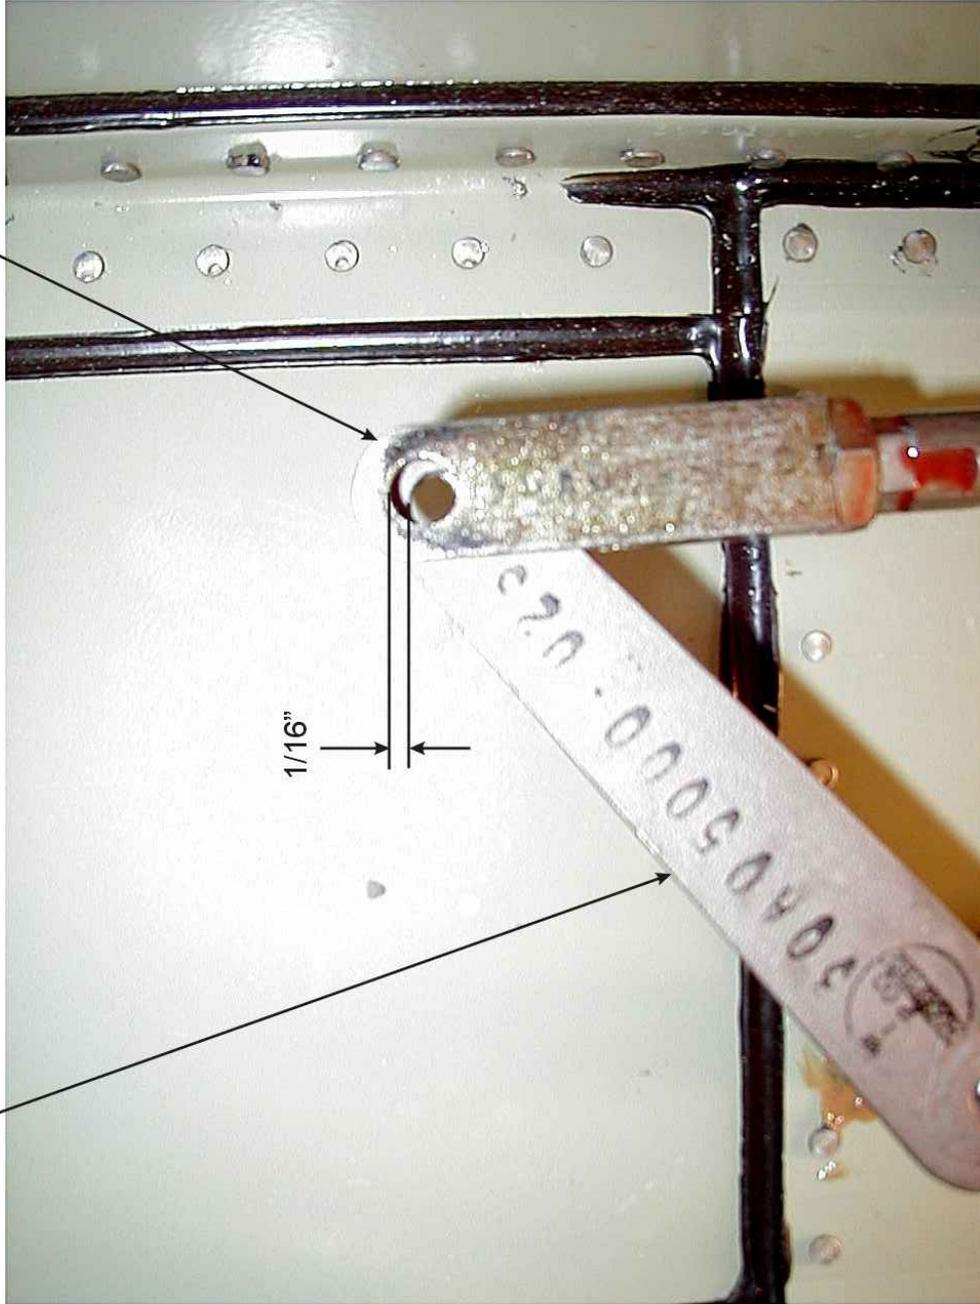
VIEW SHOWING 1/16" CUSHION, GEAR DOWN ROD END ATTACHMENT
